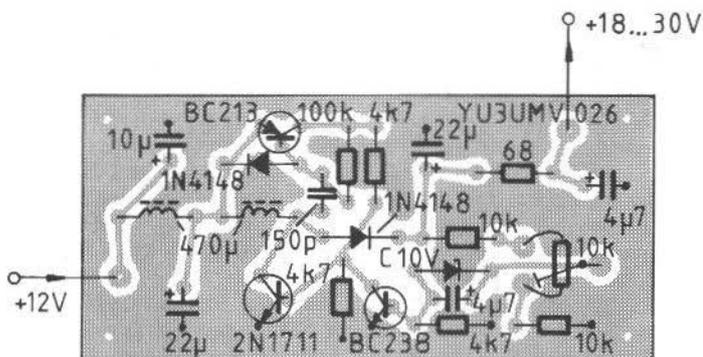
Component plan of PCB YU 3 UMV 026 (regulated DC-voltage converter)
